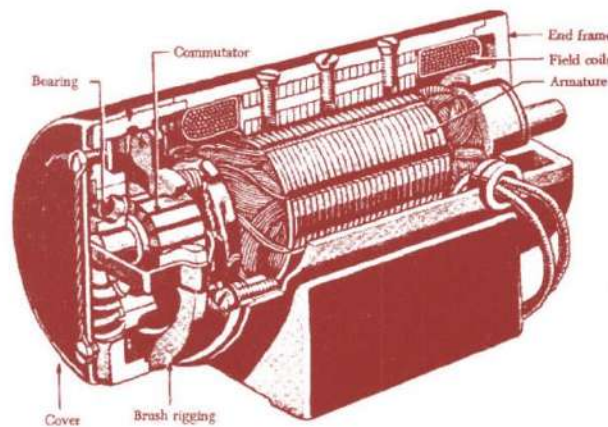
Cutaway view of a practical DC motor Armature Assembly
